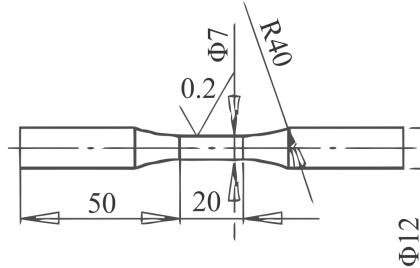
The geometry of LCF test specimens and their details (dimensions in mm)
